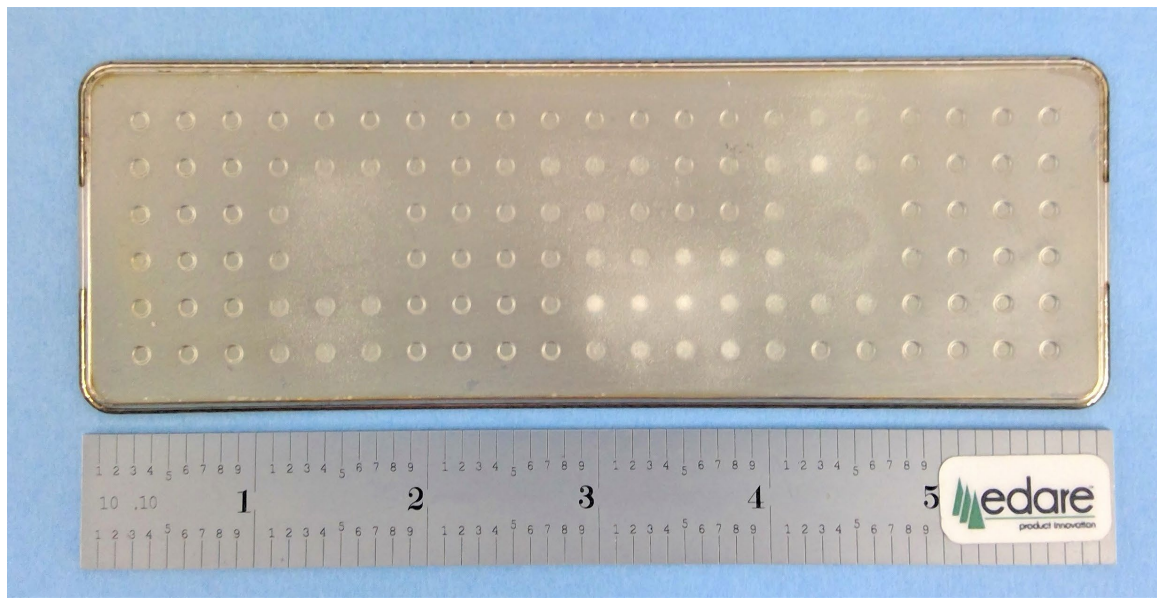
Weld Results of a Thermo-Cured Polymer Binder Coating Sample
